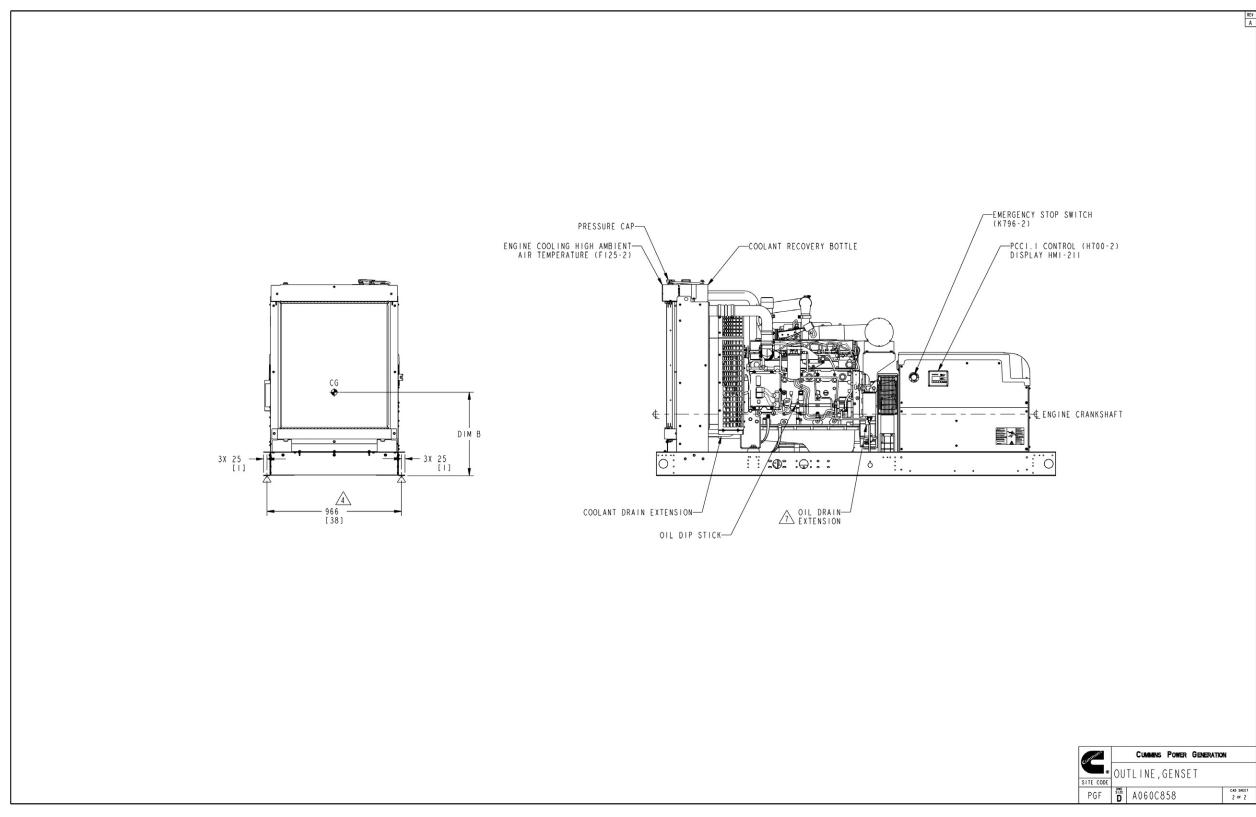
OUTLINE DRAWING SHEET 2 OF 2
